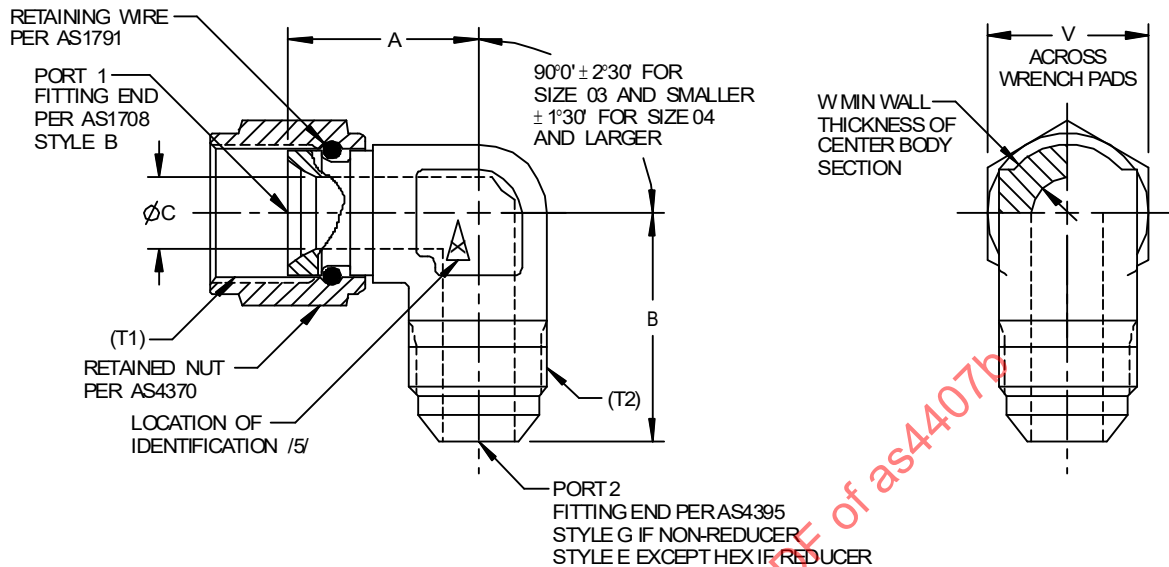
FITTING ASSEMBLY, ELBOW 90°
